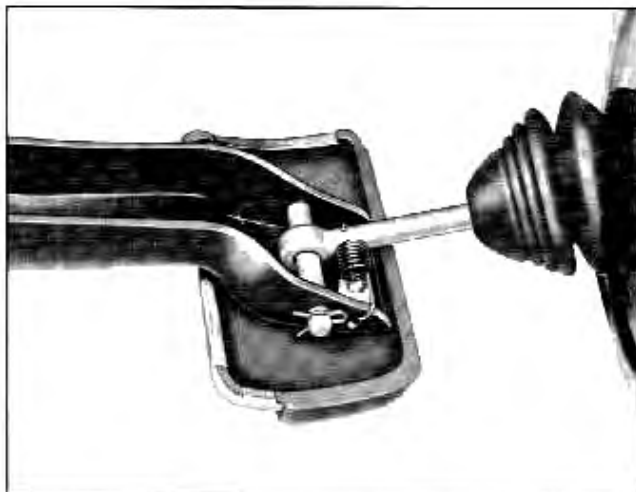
Correct Assembly of Brake Pedal to Push Rod
